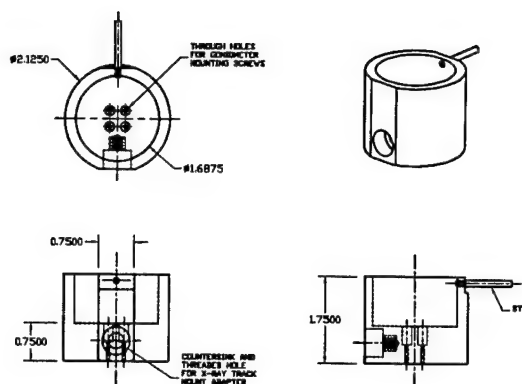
The inner shaft of the polishing jig described in the text. The material is aluminum, except for the stop, which is cut from a piece of partially threaded steel rod. The dimensions are in inches (1 inch = 2.54 cm). The threads for the track mount adapter, and the size of the through holes for the goniometer mounting screws, will vary depending on what sort of X-ray equipment and goniometer one has.
